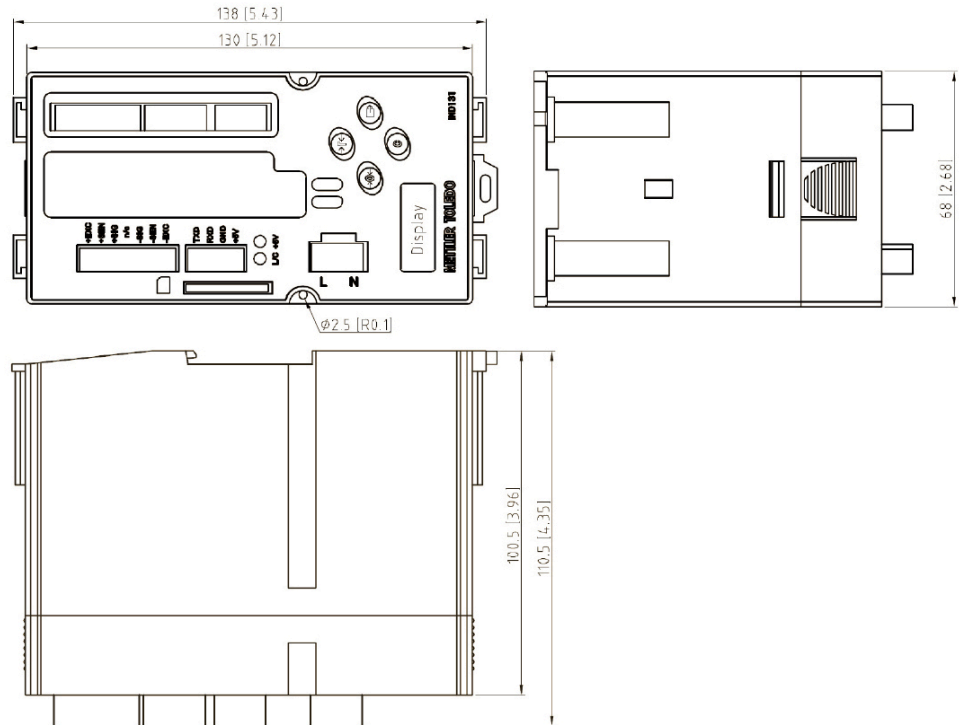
IND131 DIN Rail Mount Enclosure Dimensions
